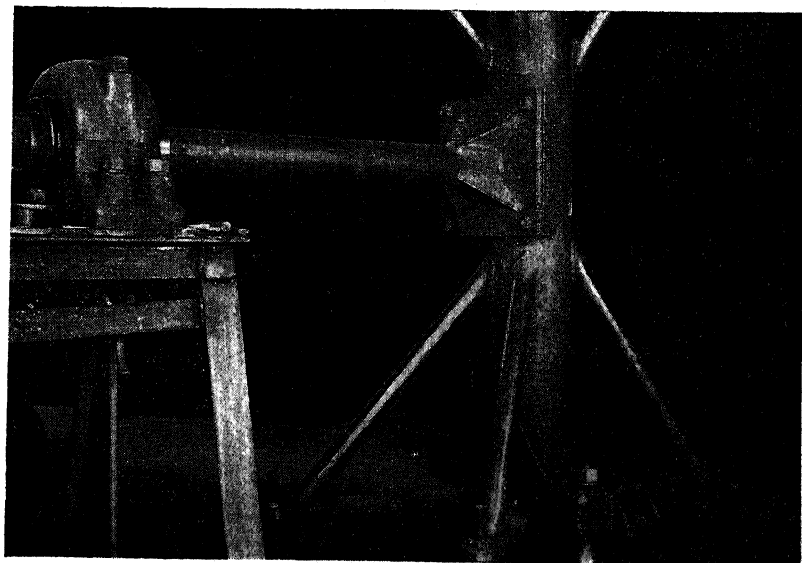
Close-up of portion of positioning jig used for welding the bucket of a tractor scraper. This fixture is built from scrap pipe and plate.
